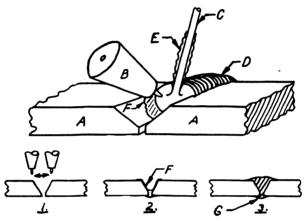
Backward method of brazing cast iron: A. Base metal (cast iron), B. Torch, C. Brass filler rod, D. Finished braze, E. Flux, F. Tinning; 1 Oxidizing torch preheat; 2 Trimming; 3 Finished braze; G. Penetration
